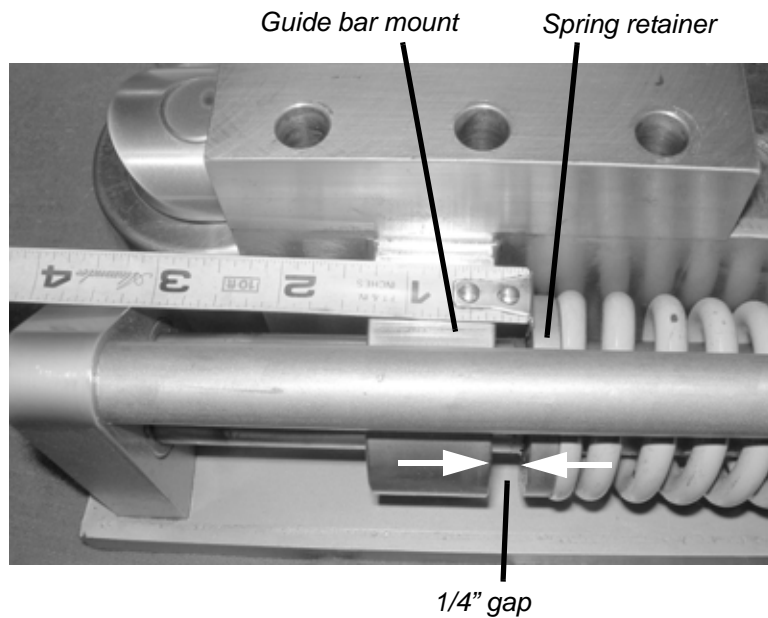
Preset the slide so there is a 1/4" gap between the guide bar mounts and the spring retainers.
